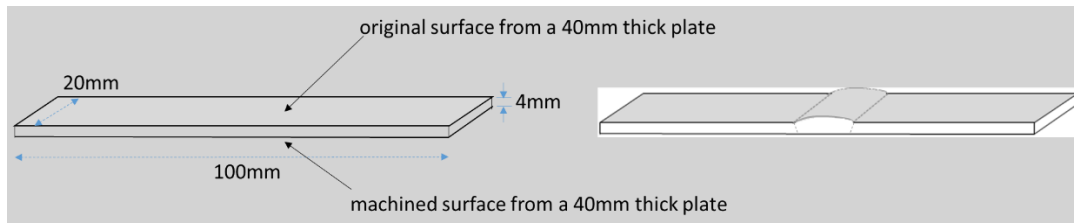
Four-point bend specimens (parent specimen and as-welded specimen)
